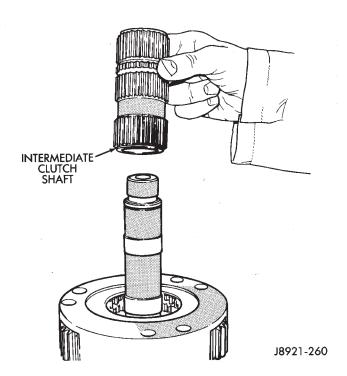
Installing Intermediate Clutch Shaft check springs and slider bracket (Fig. 77). Replace worn, damaged components.
